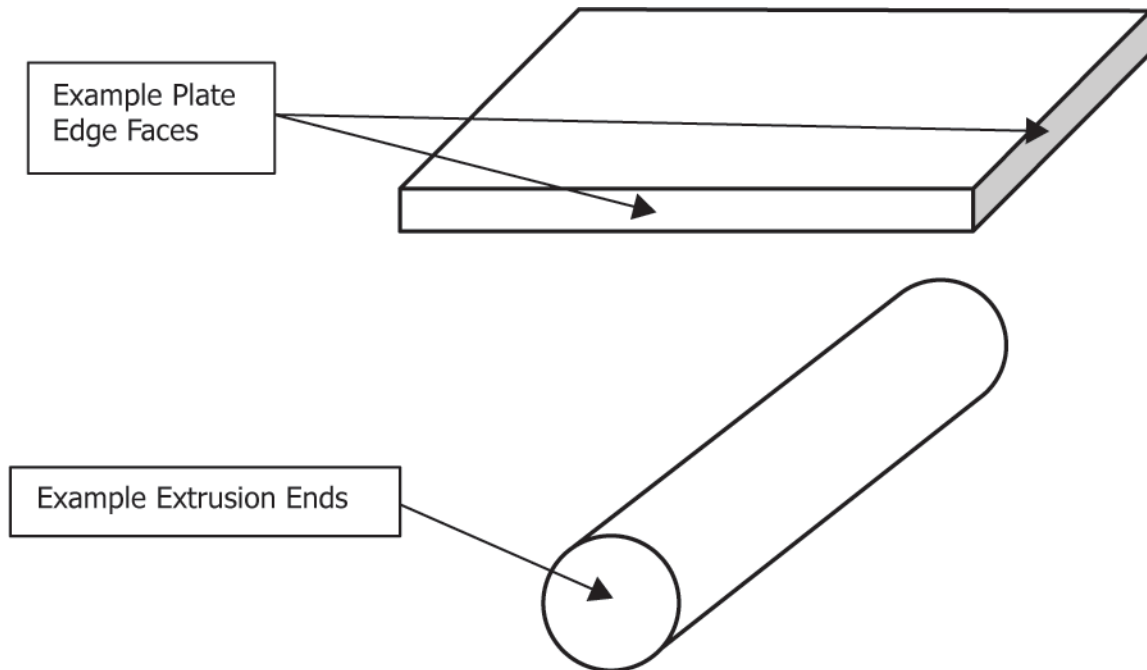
Examples of Plate and Extrusion Edge Faces/Ends
